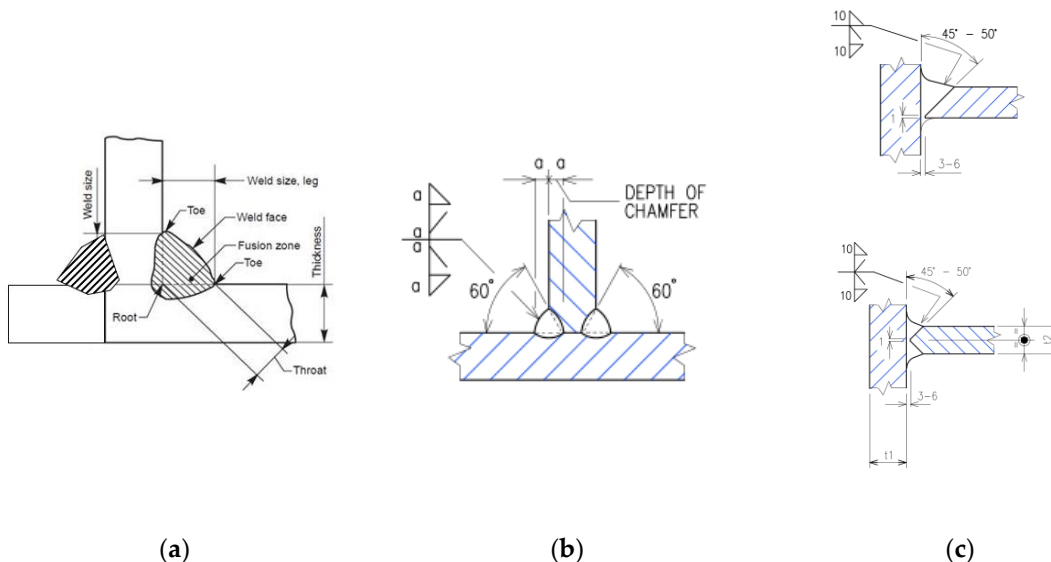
(a) Weld detail of T-joint with fillet weld; (b) weld detail of T-joint with partial penetration weld; (c) weld detail of T-joint with single-sided or double-sided full penetration weld
